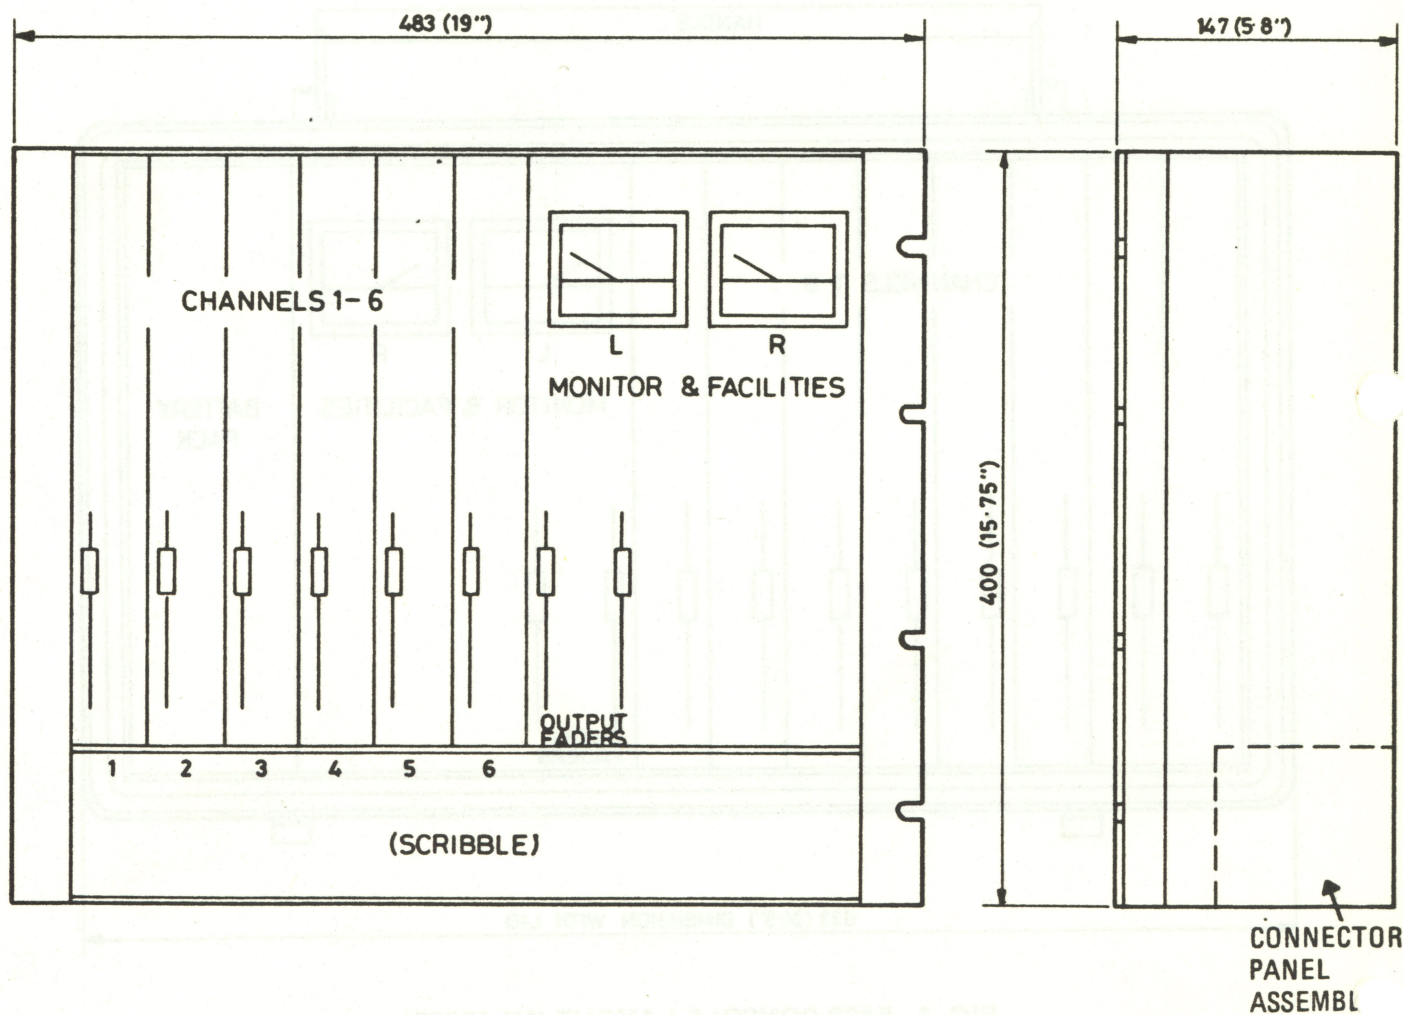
5422 — R CONSOLE LAYOUT (MR60076)
